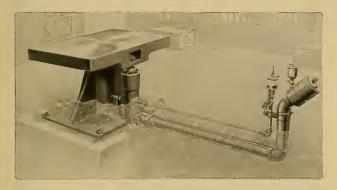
Plain Jolt-Ramming Moulding Machine with only Sufficient Foundation to hold the Machine in place. The Sand may be filled around the Machine as the working parts are protected.
